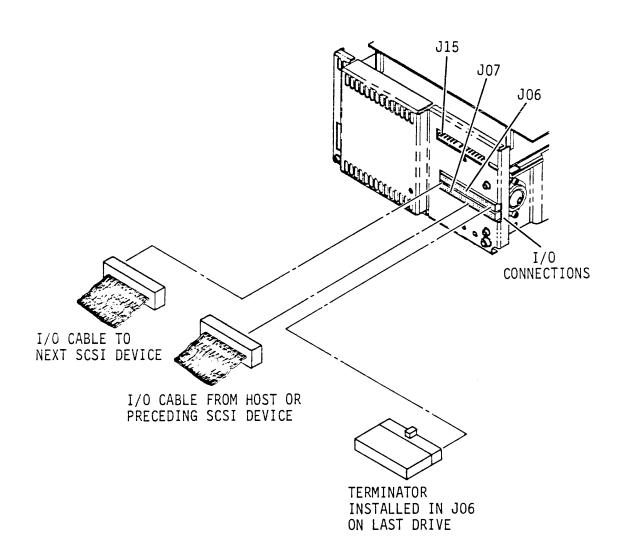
I/O Cable Attachment (Sheet 1 of 2)
